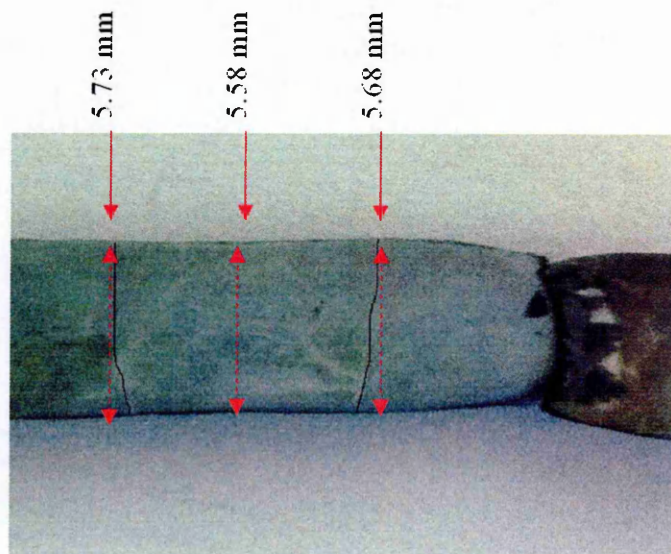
Weld beads and fusion boundaries adjacent to the ruptured location are indicated on the photograph from the top specimen
